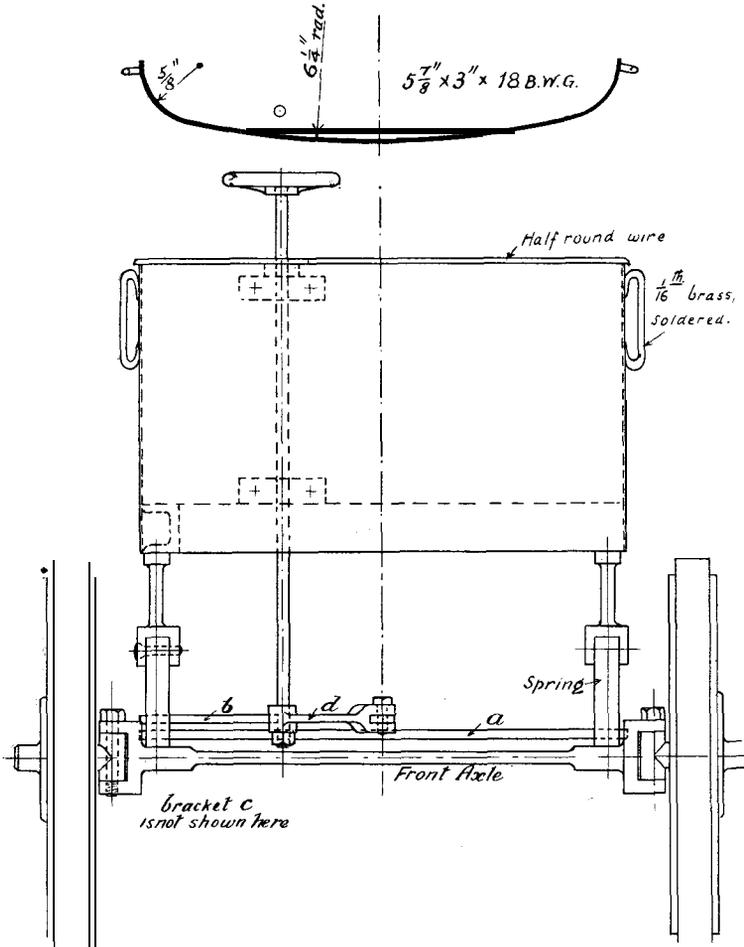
VIEW SHOWING ARRANGEMENT OF FRONT PLATE, STEERING GEAR, AND FRONT AXLE. (Half full size.)
